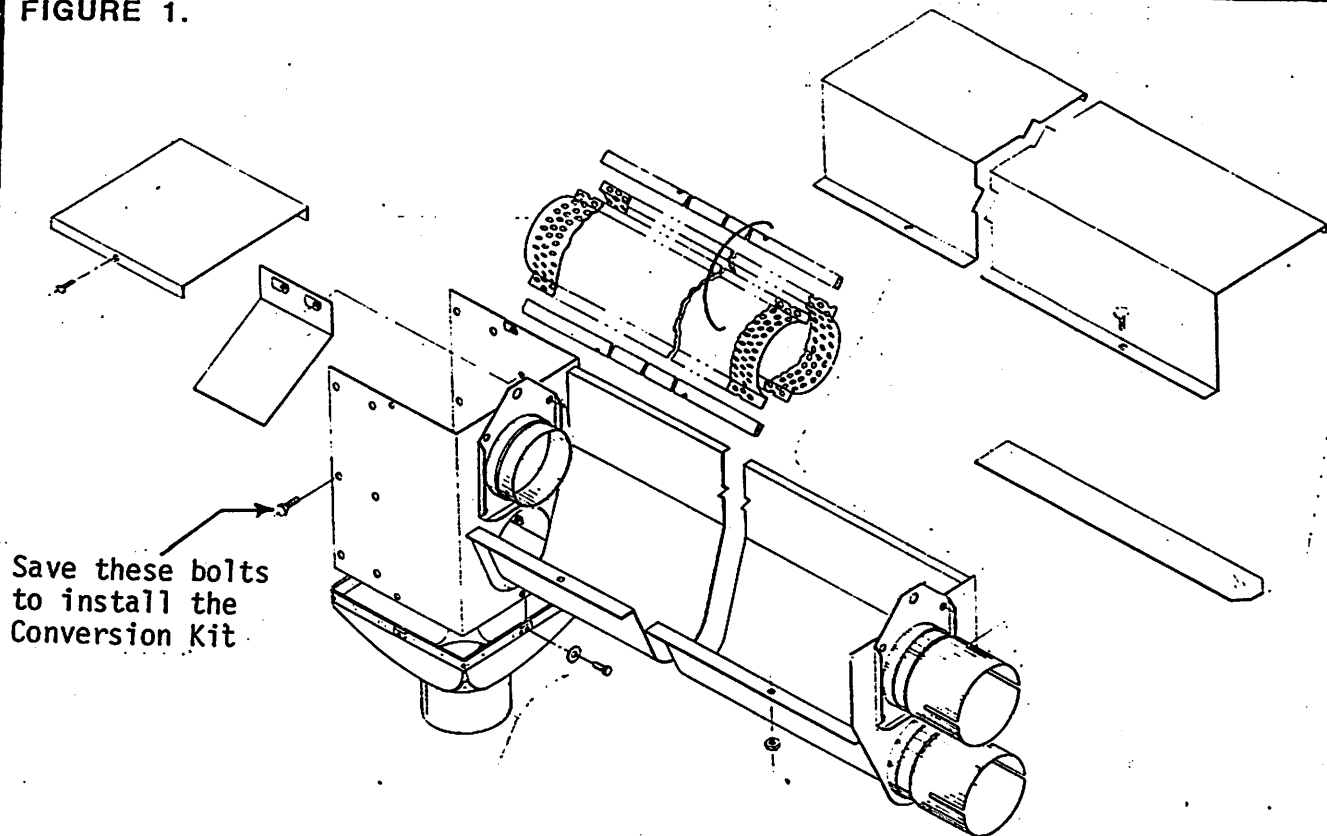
Remove these Gear Drive Assembly parts and discard.
